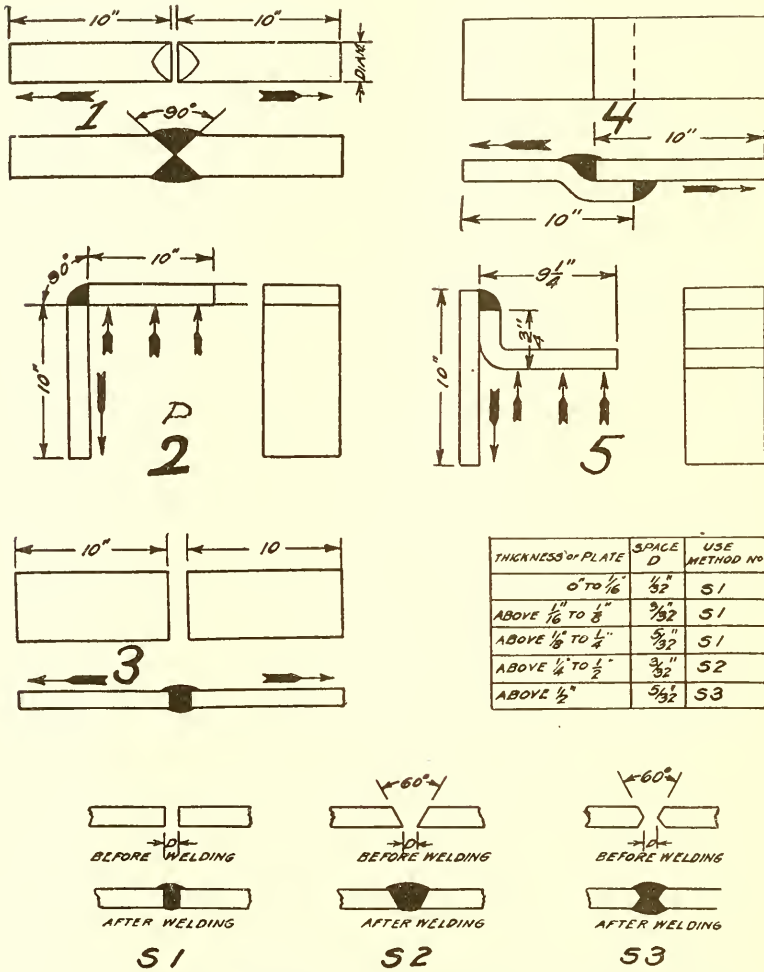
Kinds of Welds Tested and Examples Used as Welding Guides.
